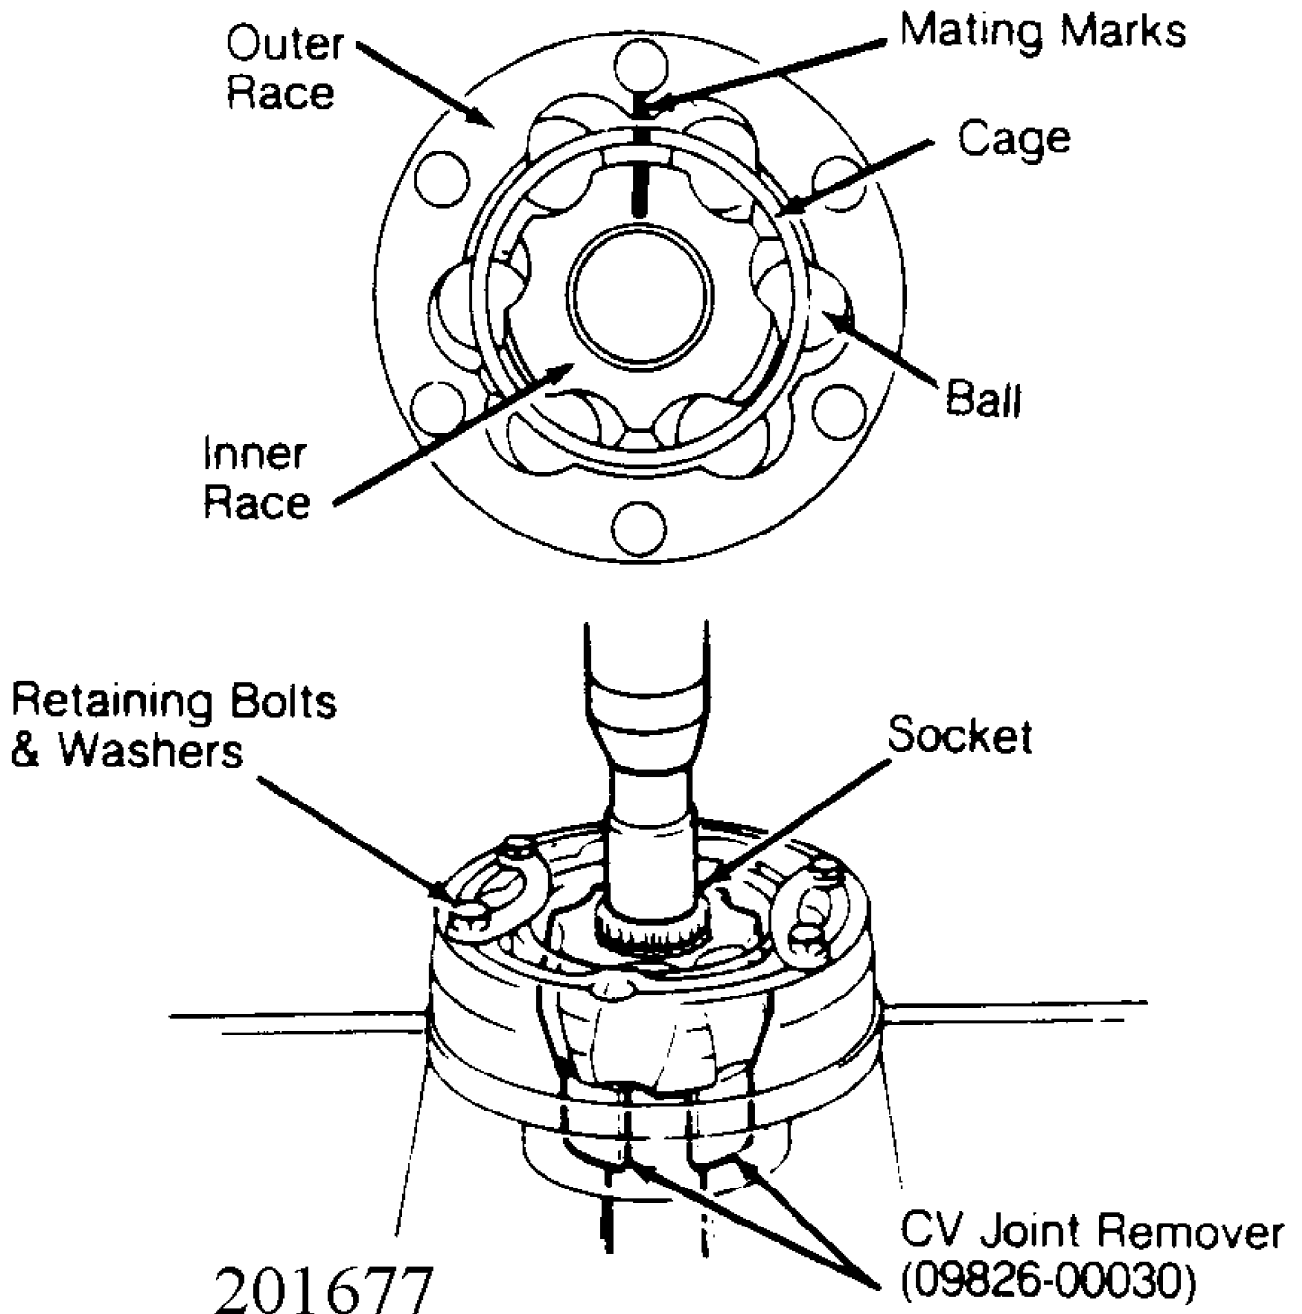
Pressing Inboard CV Joint From Axle Shaft
